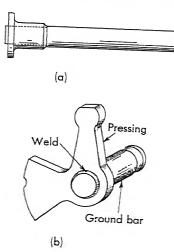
Dividing a component. (a) A generator shaft; originally produced as a forging: due to the difficulty and delay in obtaining forgings, the method was changed to making from stock bar plus a steel casting shrunk on to the end. (b) A selector for gear box; formerly produced as a forging and has now been changed to a fabrication from a pressing and a shaft welded together. Apart from the saving in material, the production is very much easier as the forging was very awkward to hold for turning. The revised method showed a saving in material cost of 55 per cent and a labor cost of 35 per cent.
